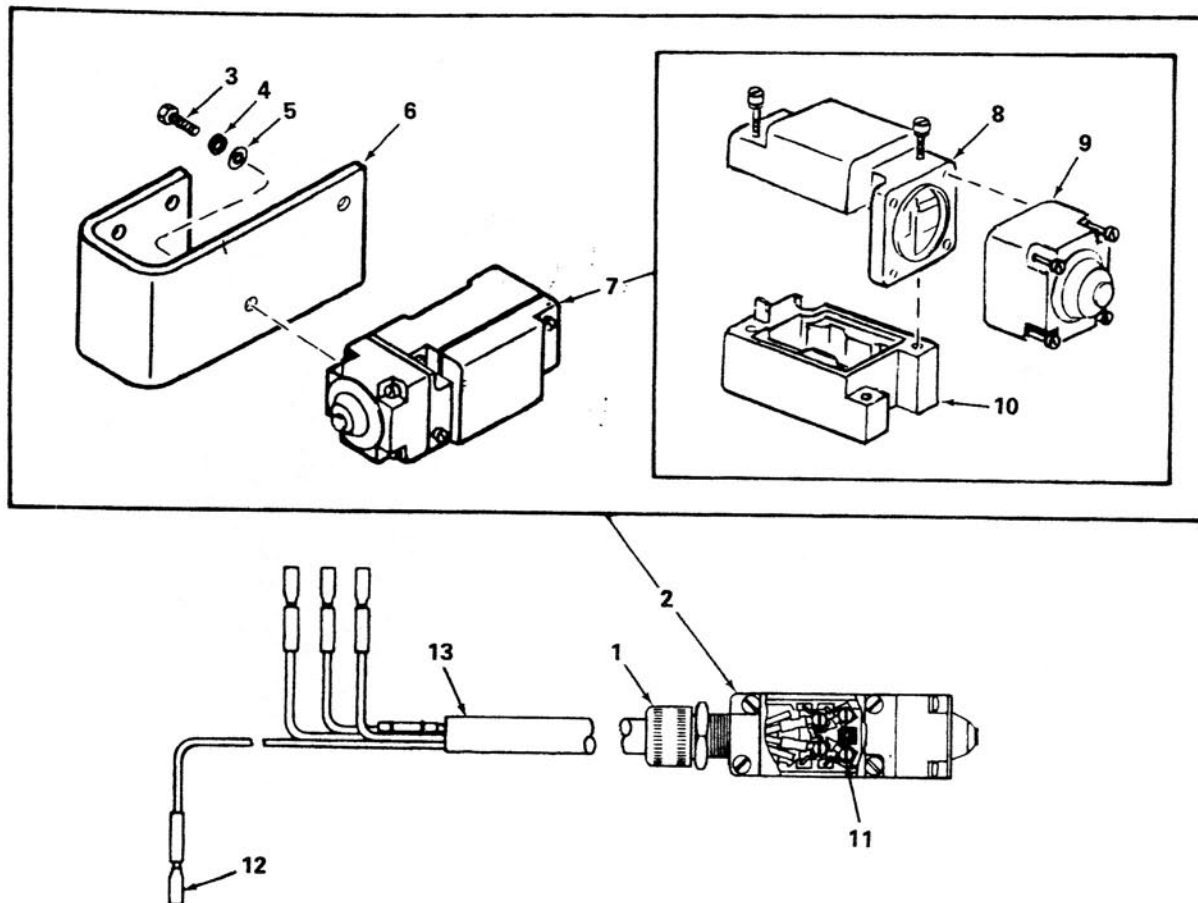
CABLE ASSEMBLY SWITCH /8167414/
